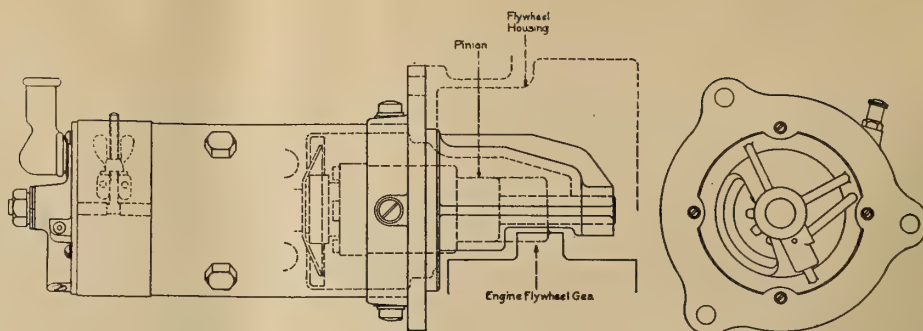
STARTING MOTOR FOR OUTBOARD SHIFT
